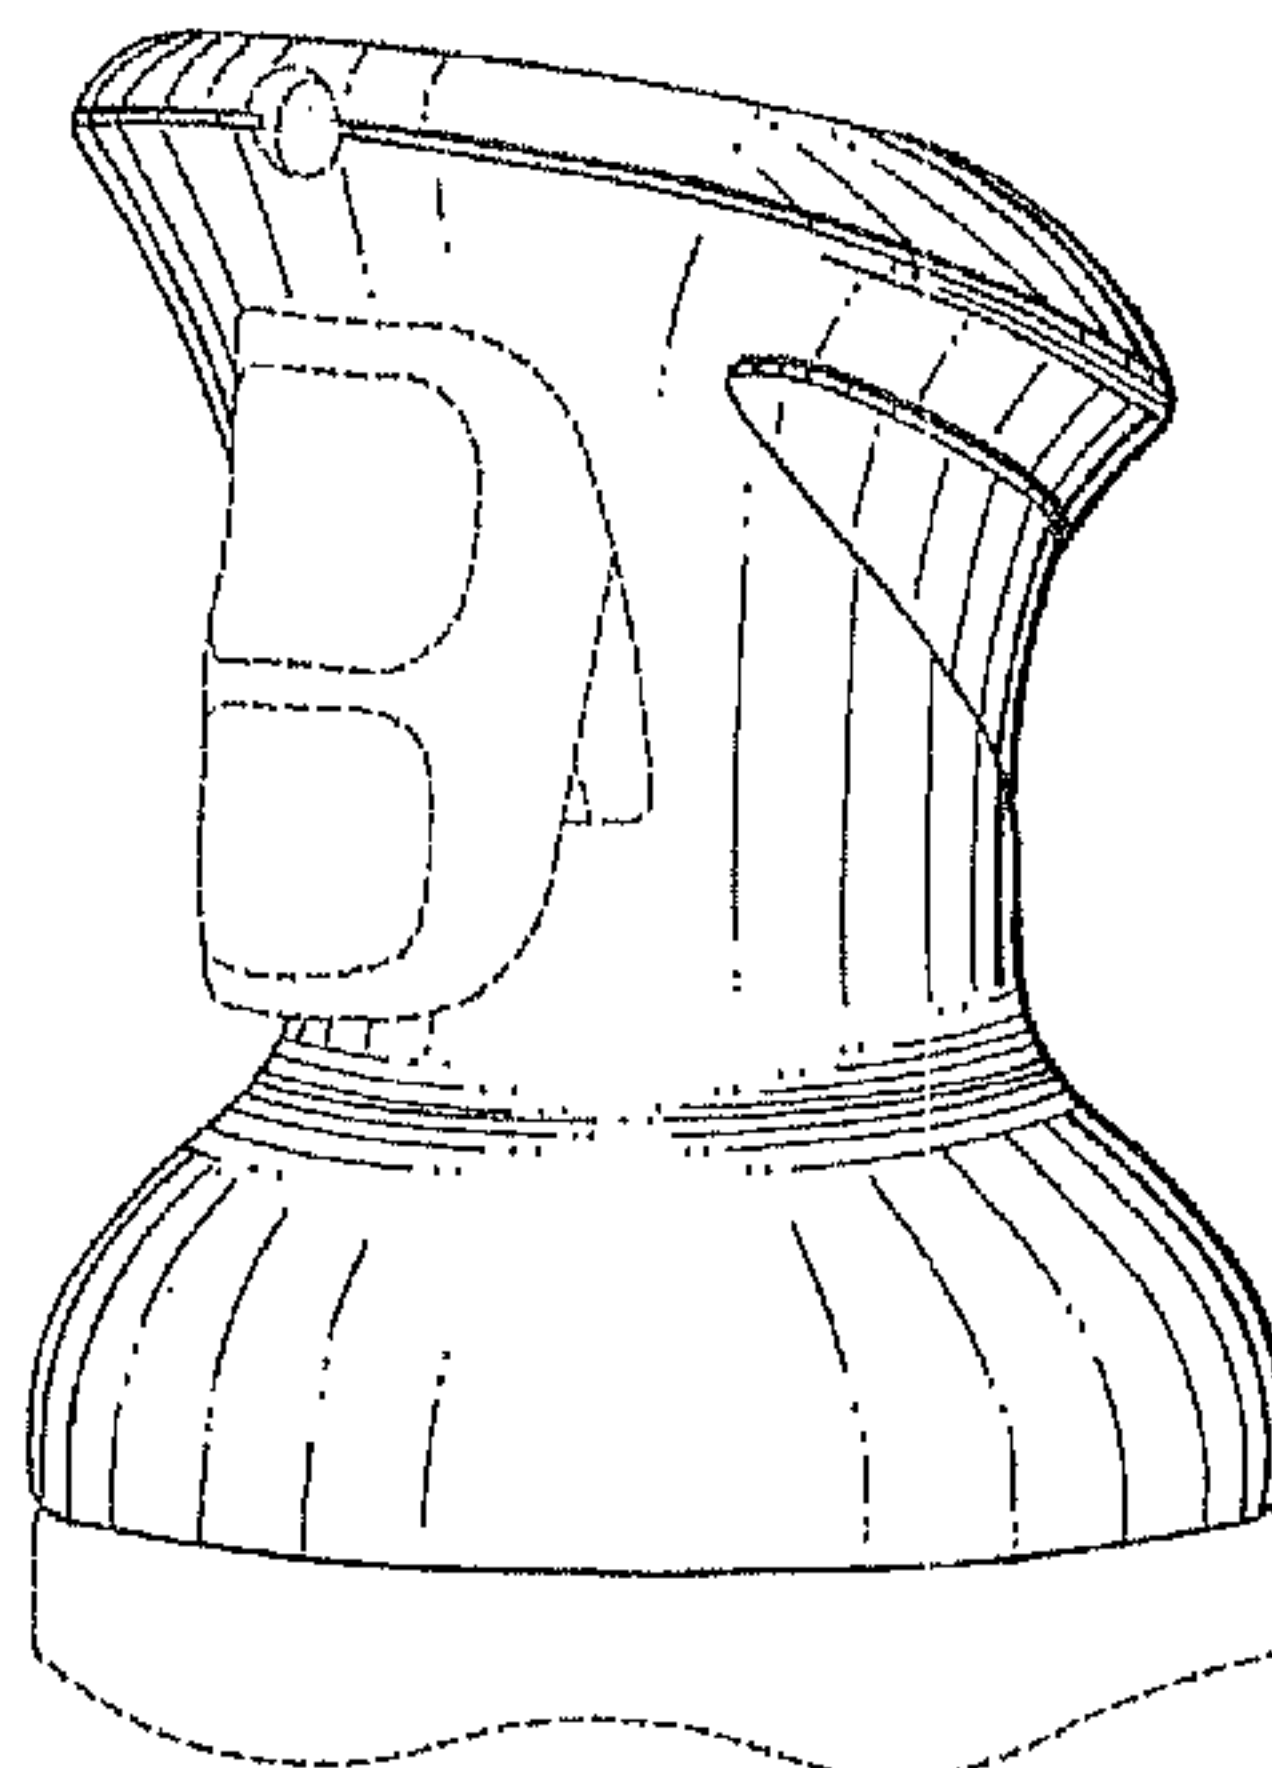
is a right side view of the fourth embodiment of the shroud, the left side view being a mirror image thereof;
